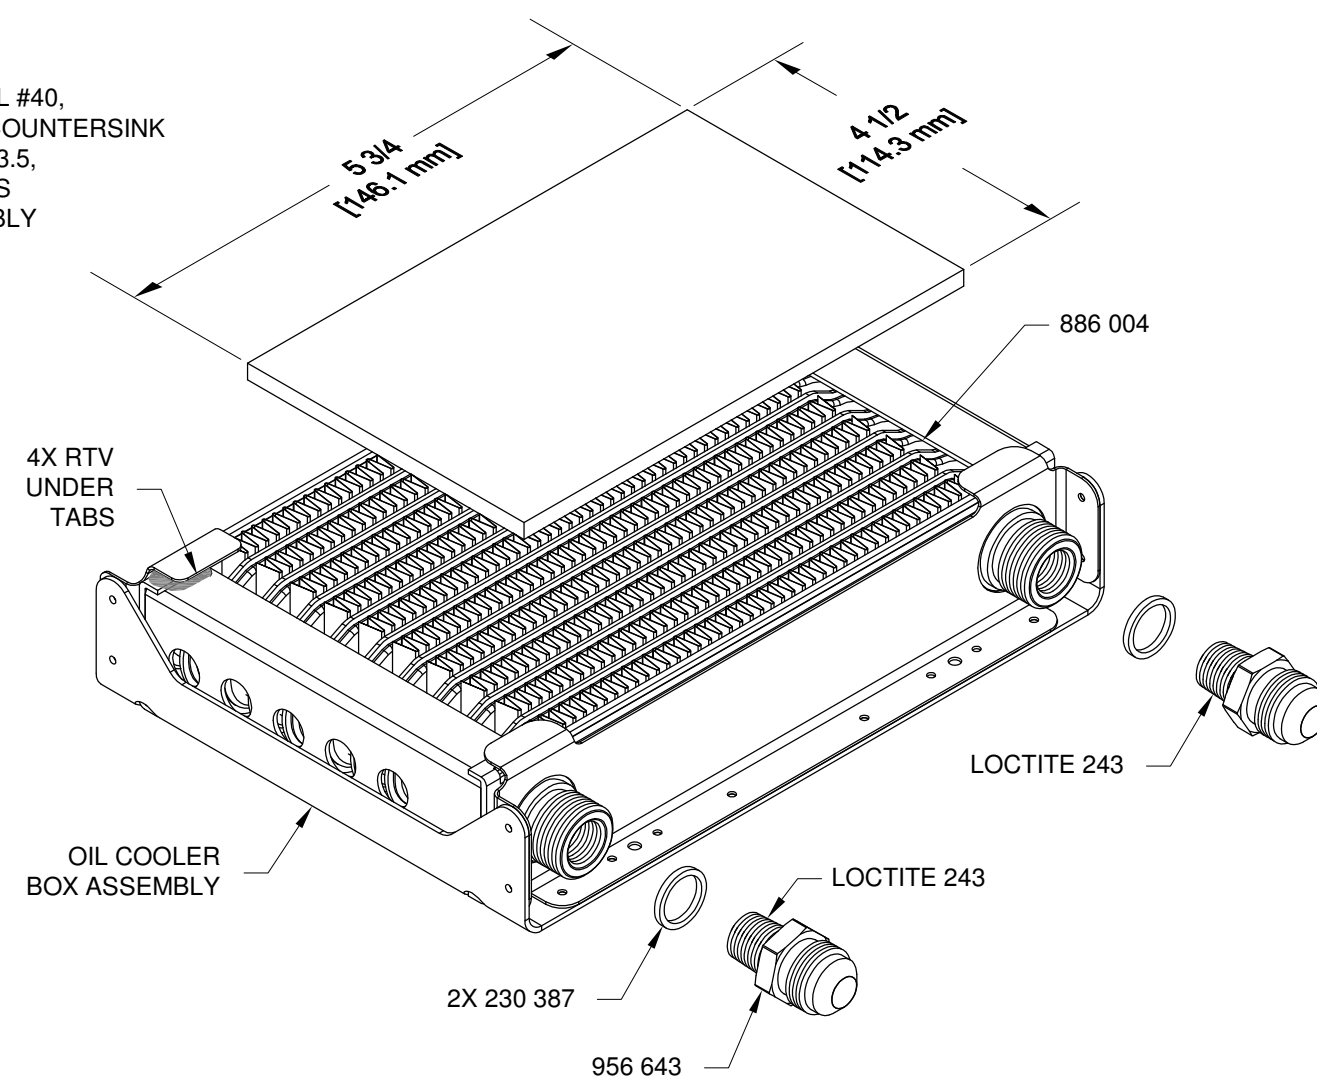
OIL COOLER BOX FINAL ASSEMBLY
